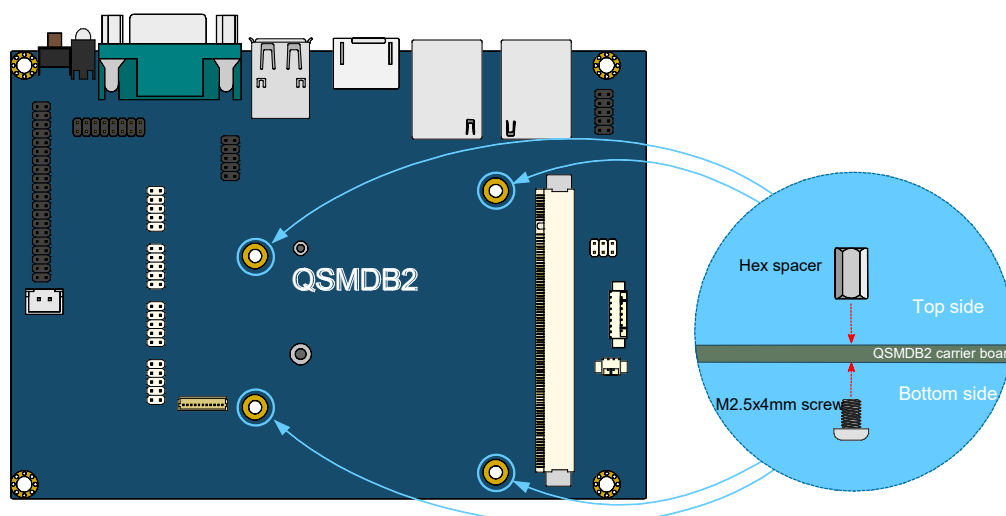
Installing the hex spacers on the QSMDB2 carrier board
